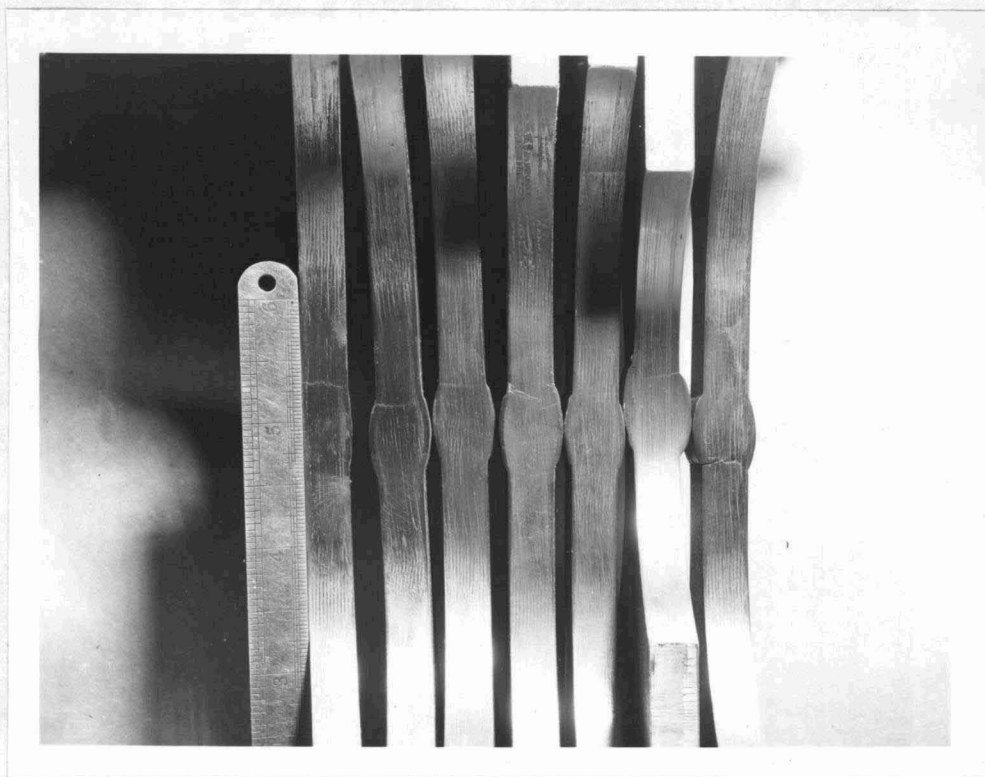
SPECIMENS WITH INITIAL FRACTURES
